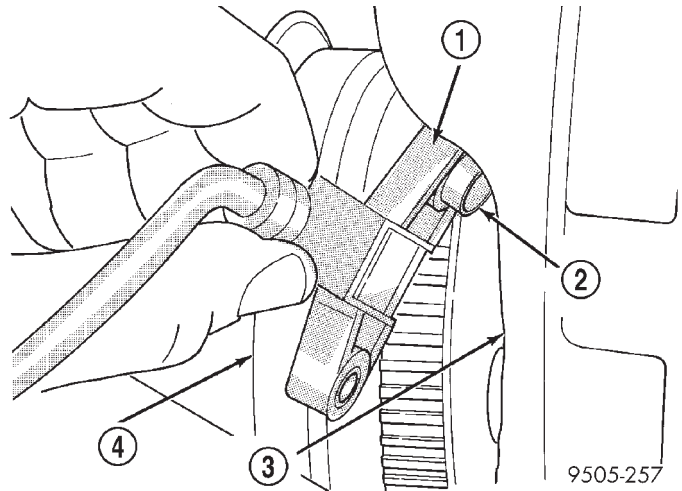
Installing Speed Sensor Head In Steering Knuckle
